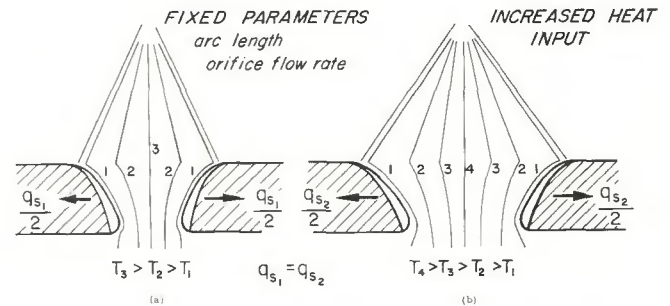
Shows two keyhole mode plasma arc welds with all the welding parameters held constant except heat input; (b) has an increased heat input over (a)
